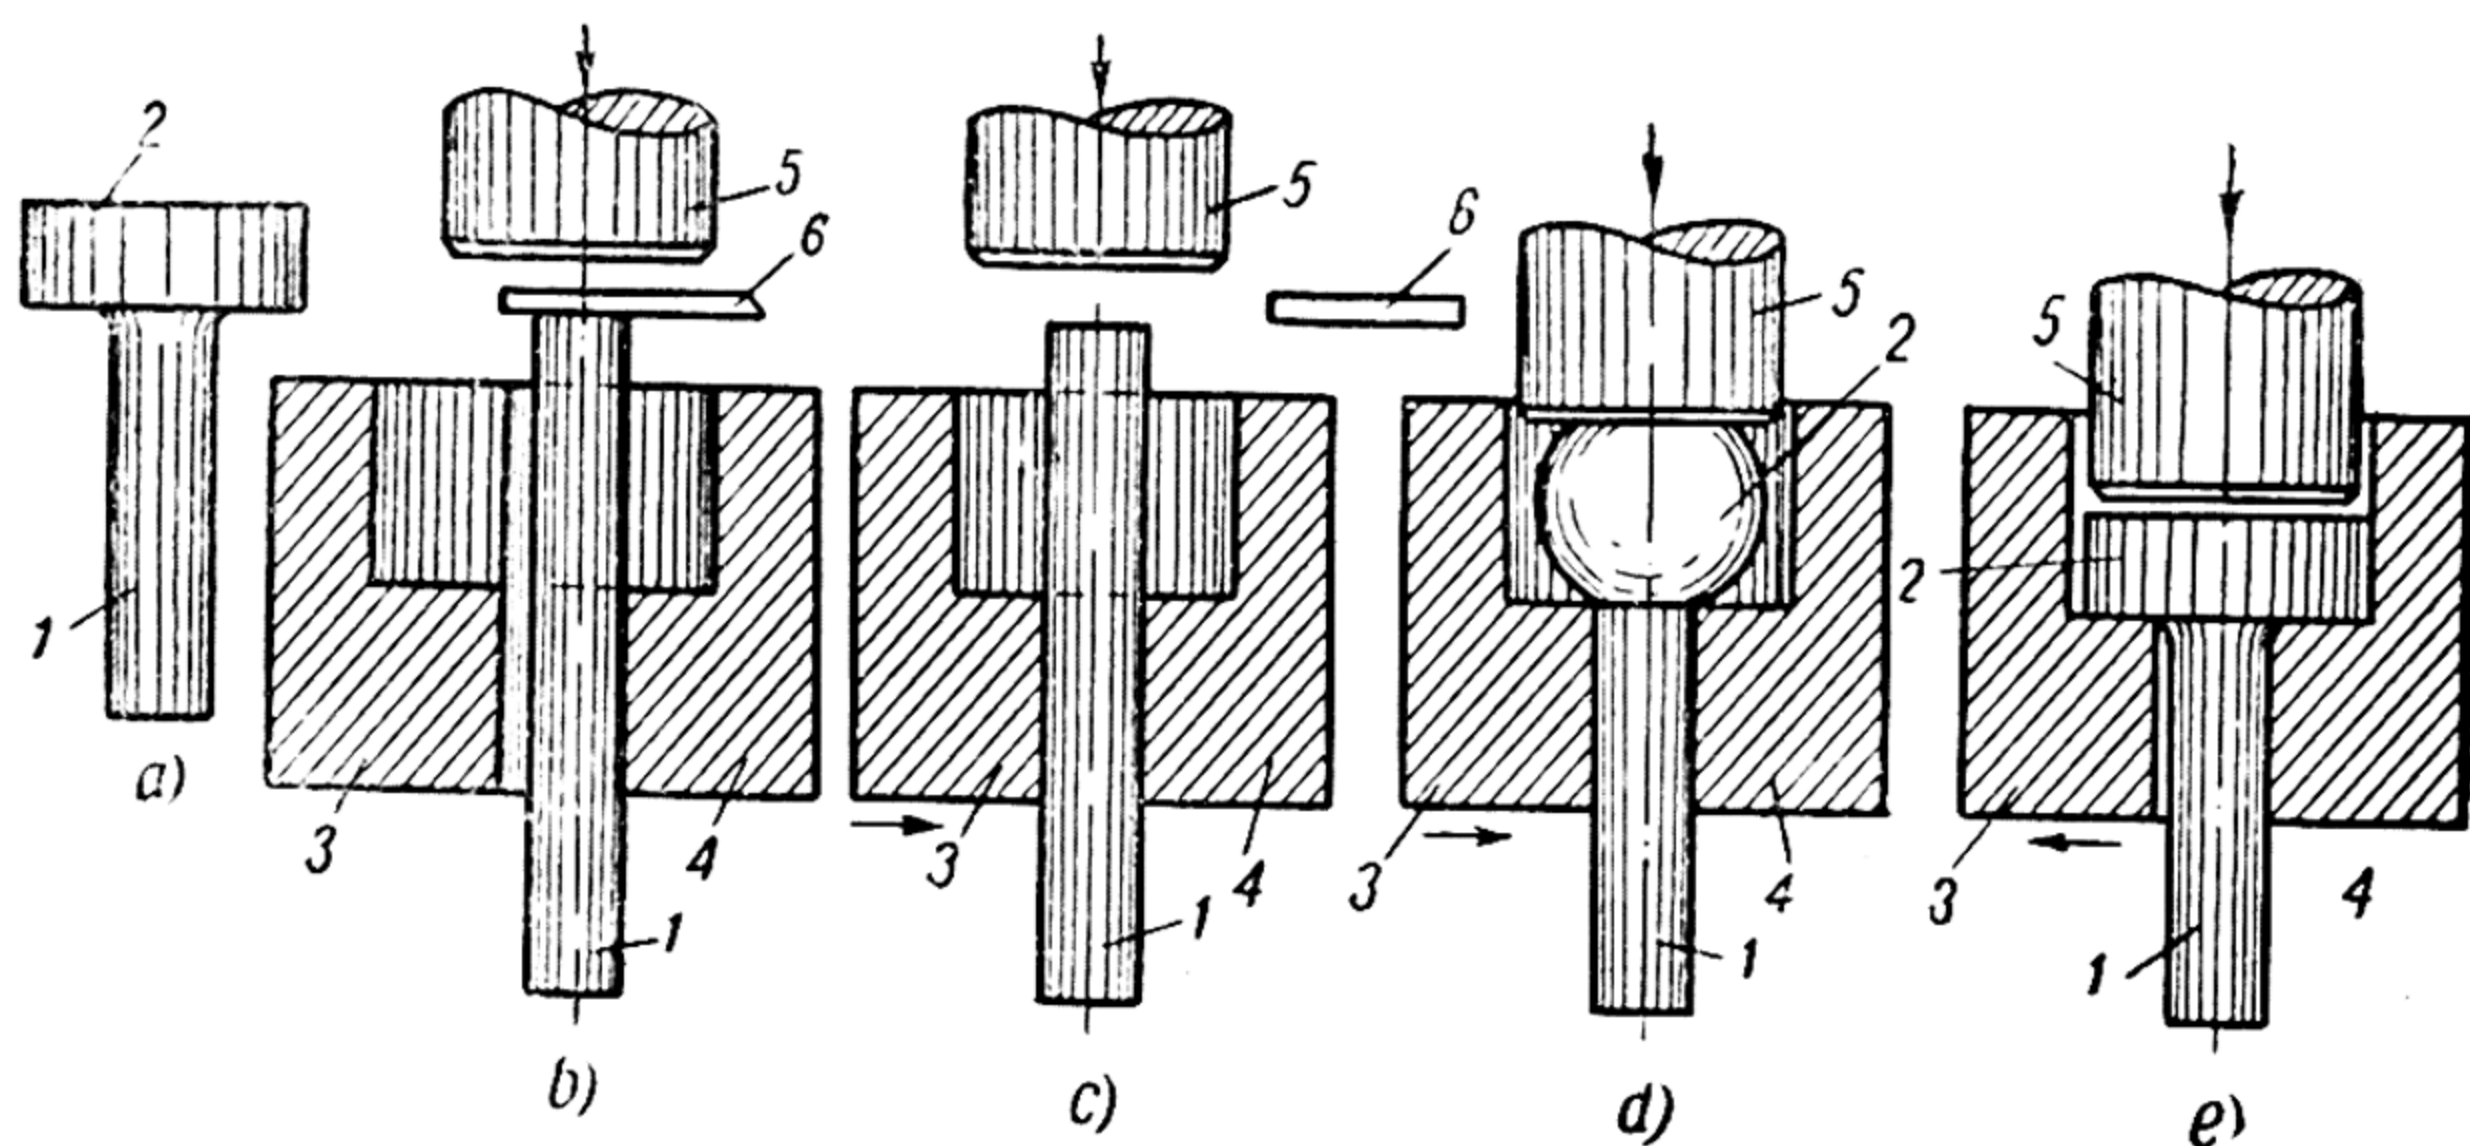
Diagram of upsetting process in a horizontal forging machine: a) forging; b) position of stock at starting of machine; c) upsetting dies closed and automatic stock-gauge retracted; d) end of upsetting—heading tool (5) and dies (3) return to original position
